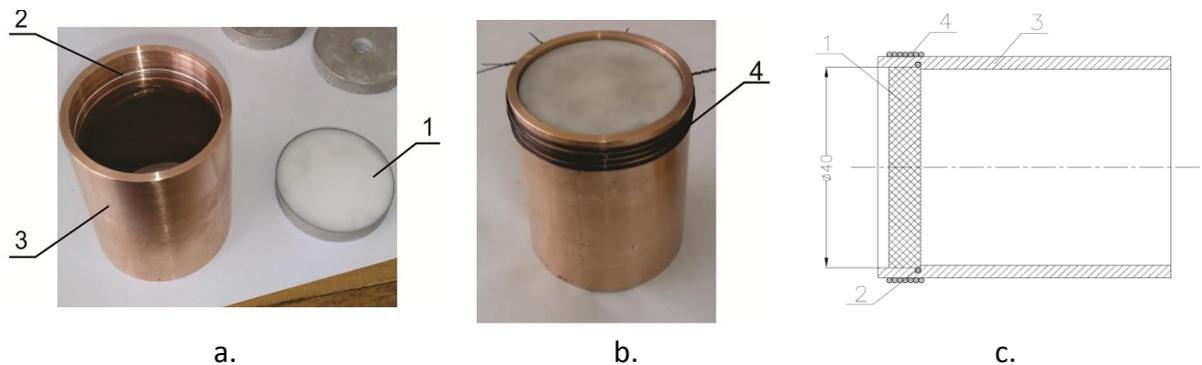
1: The view of the ceramic to metal sample and the assembling scheme.
